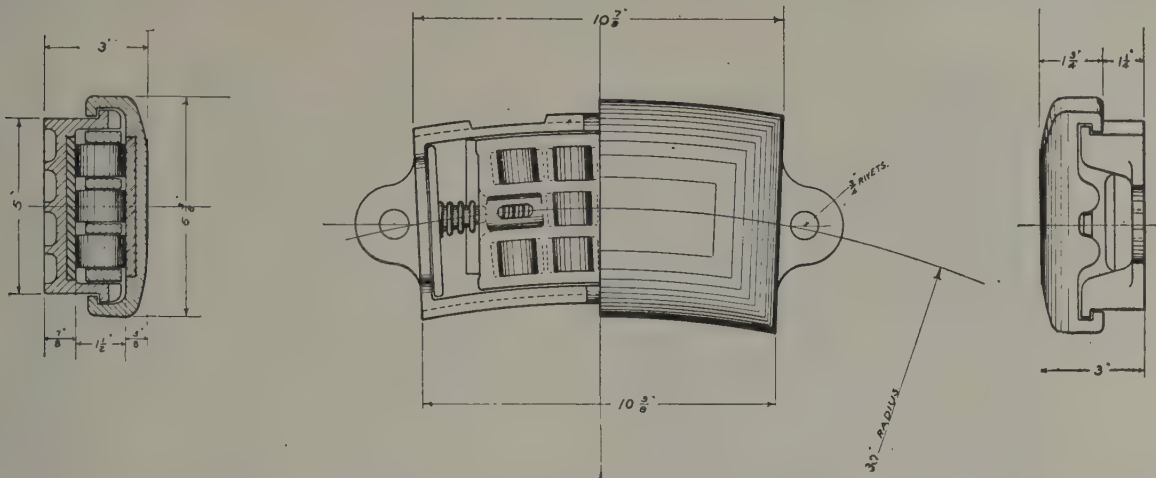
Perry Side Bearing No. 20 for 50-Ton Cars. Joliet Railway Supply Company.
